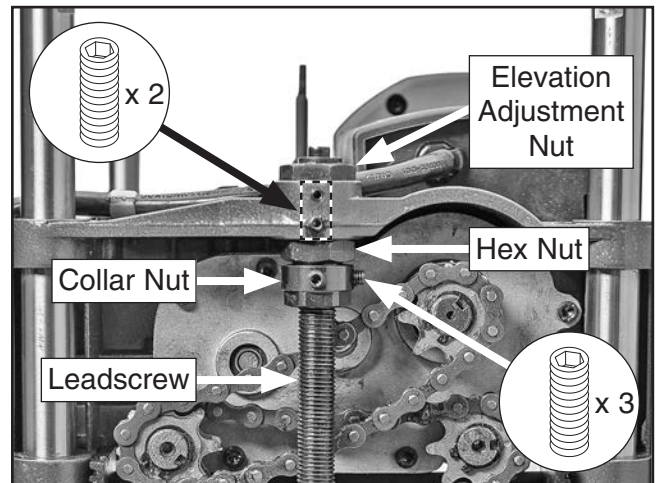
Location of headstock adjustment components. (Top assembly and side covers removed for clarity.)
